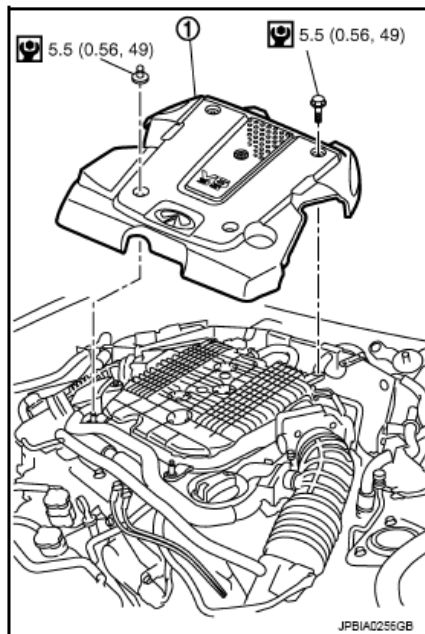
Exploded View Of Engine Cover With Torque Specifications
